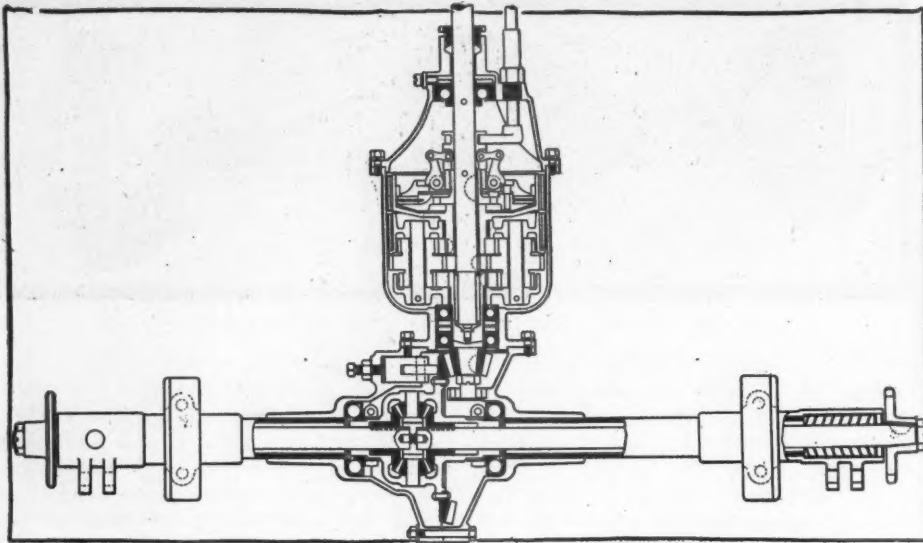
MUNCIE COMBINED PLANETARY GEARSET AND JACKSHAFT
